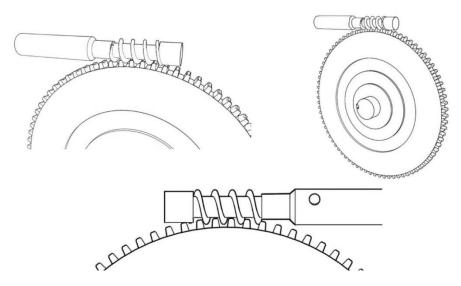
Shaft drive with a worm gear arrangement^[58]
